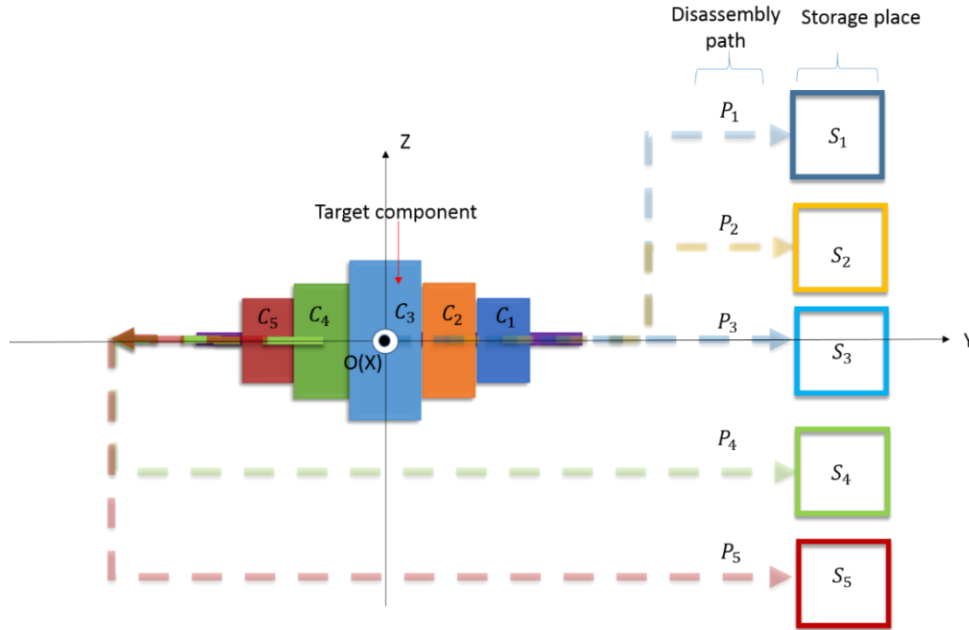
Mechanical assembly and parts' trajectories for disassembling target component C_3
